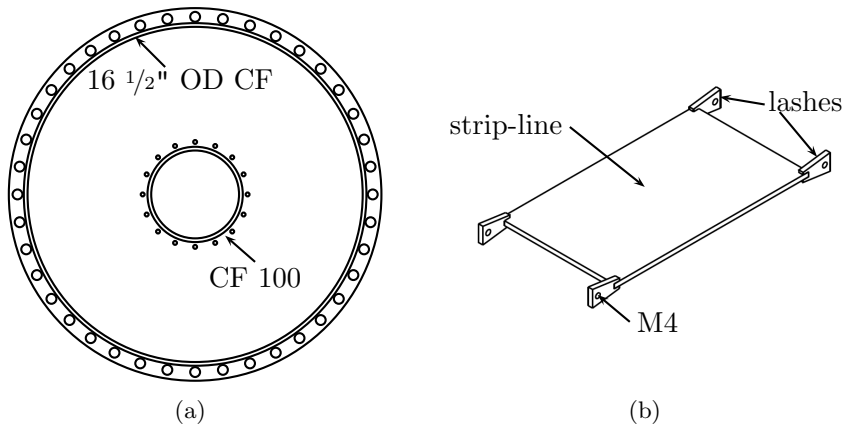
(a) Schematic drawing of a zero length reducer from 16 1/2" OD CF (outermost edge) to CF 100 (inner circle). Two such pieces were used to close the cavity. (b) Schematic drawing of the strip lines including the lashes for fixation.
